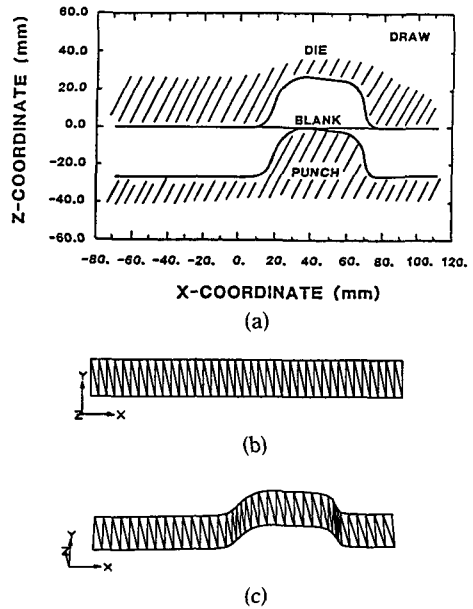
(a) Tooling geometry, (b) initial FEM mesh, and (c) finally-formed mesh for simulating a draw section of automotive hood inner panel
